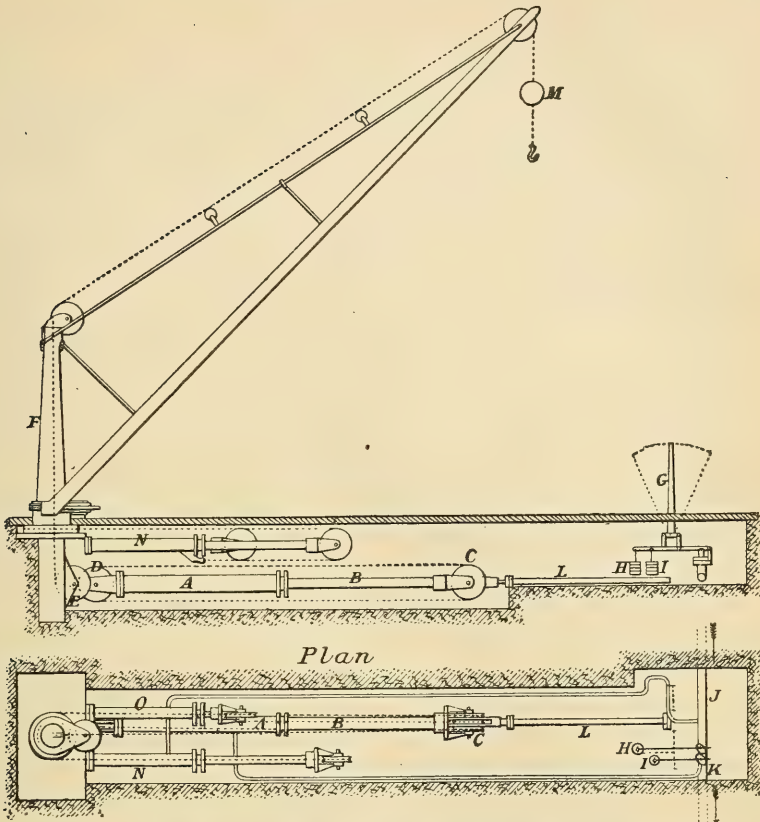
Hydraulic Crane. General Arrangement of Machinery.
